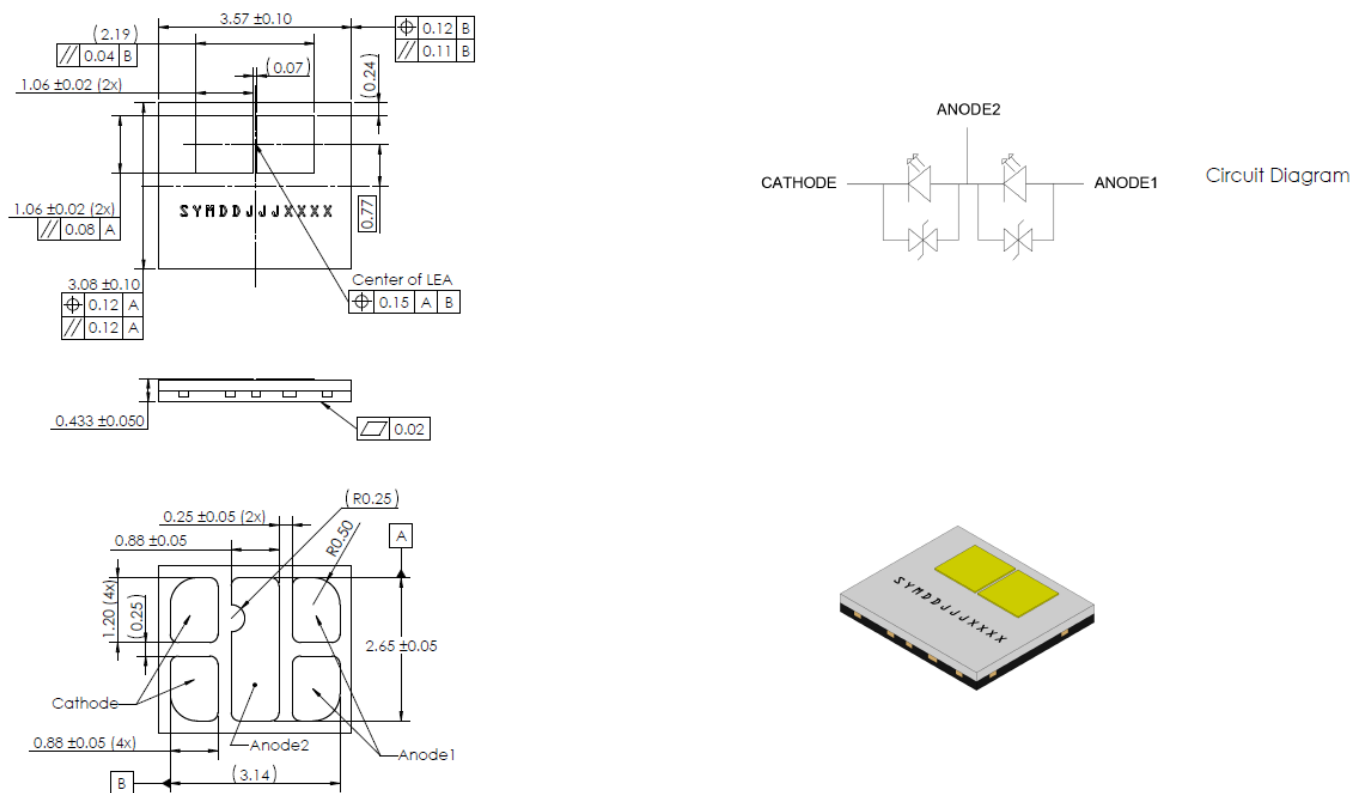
Mechanical dimensions for LUXEON Altilon SMD-A 1x2
